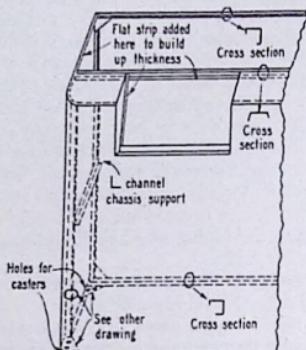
Assembly details of the transmitter console. The pieces are assembled with small rivets and then spot-welded.
